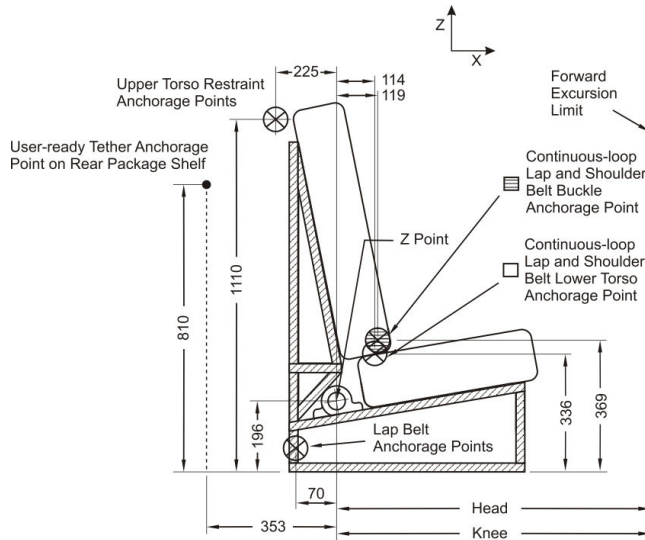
Side View of Standard Seat Assembly Indicating Location of Seat Belt Anchorage Points
